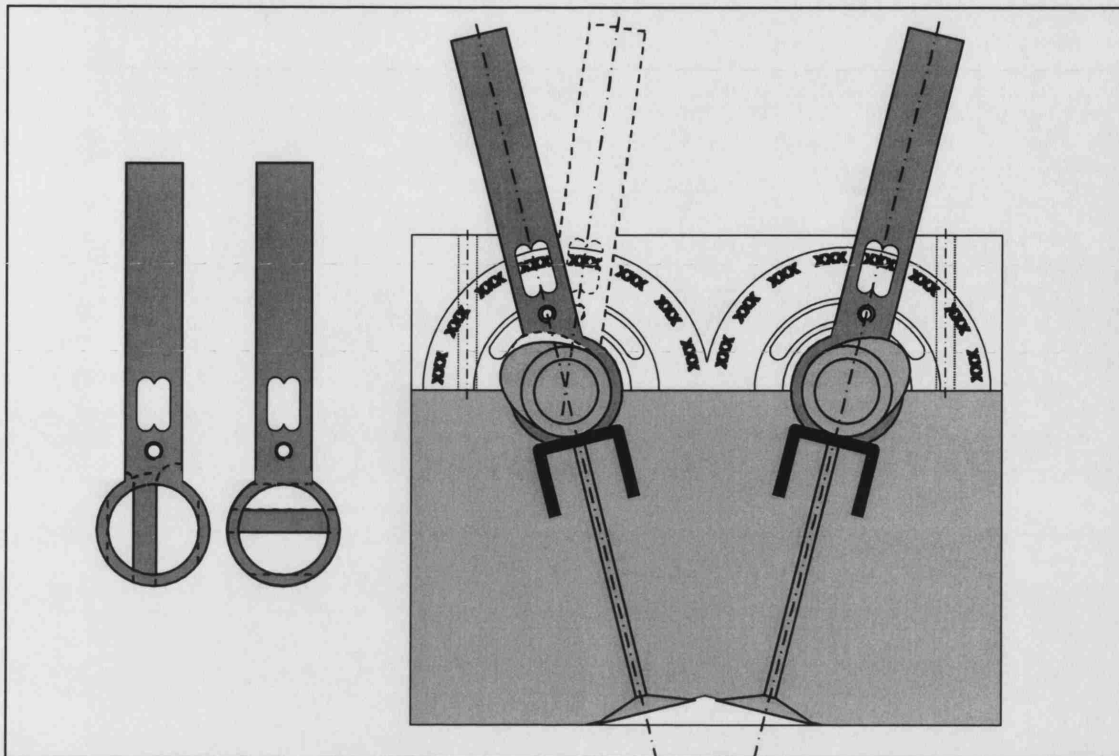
Camshaft timing arms and plate mounted on the cylinder head
